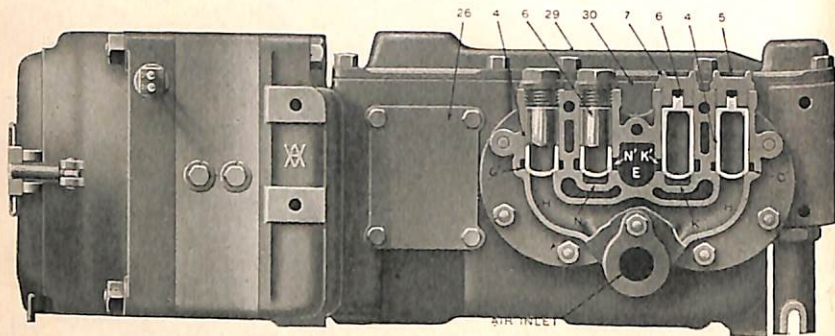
Type DH Compressor with Cylinder Cover in Section
